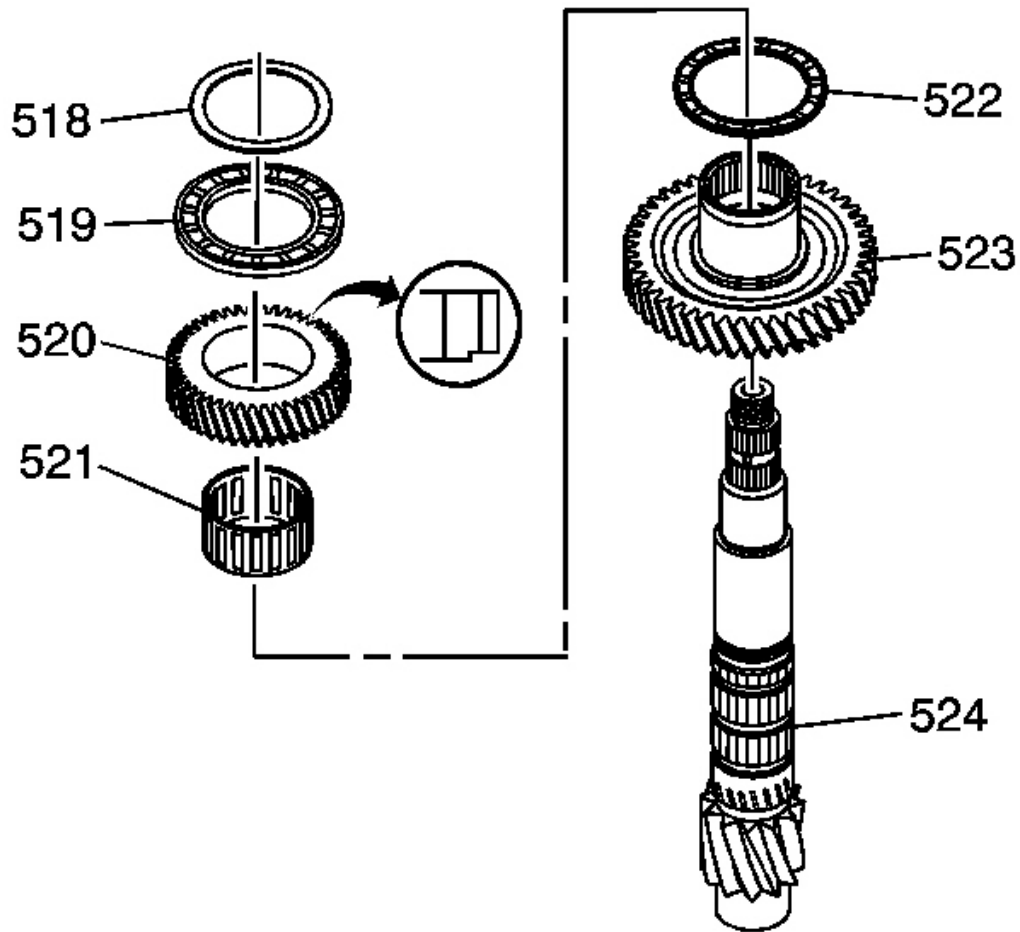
1st/2nd Driven Gear Output Shaft & Components Removed
